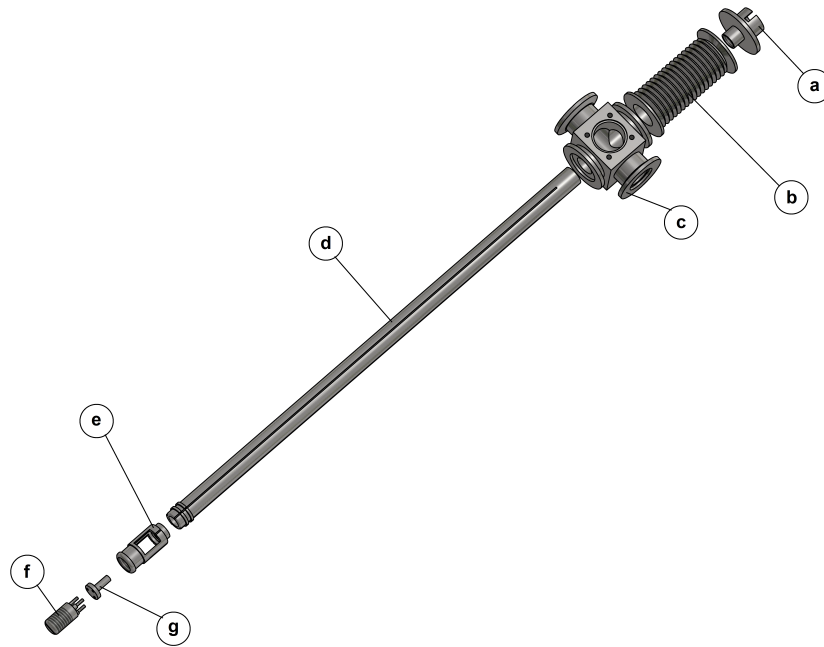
Various components of the stress probe: a) Force sensor housing. b) Bellows. c) Connector block. d) Body of the probe. e) sample holder housing. f) Anvil. g) Hammer (electrical components are not shown).
